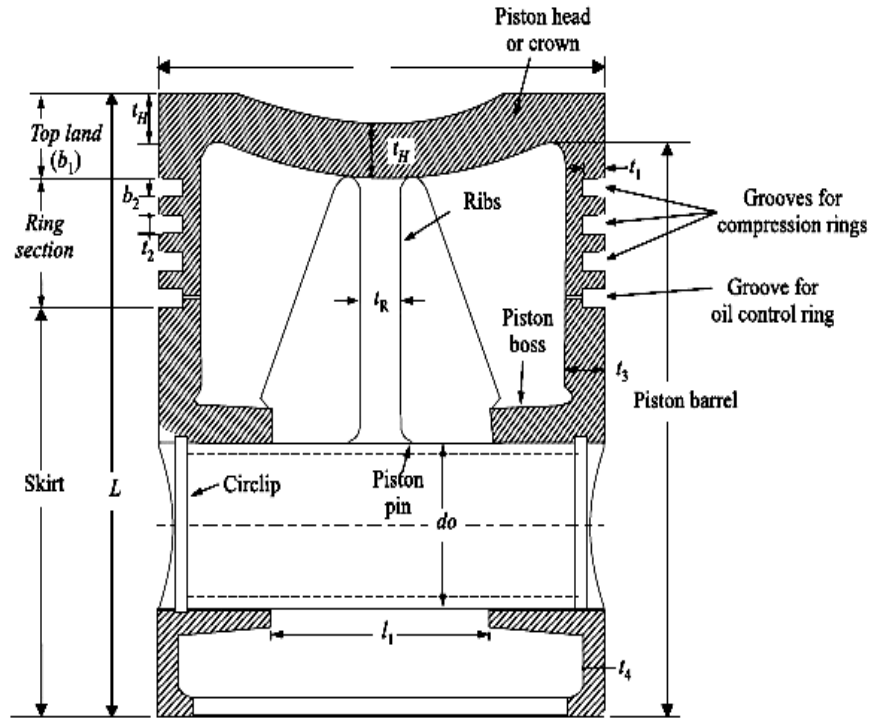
22 Forces or Loads on a Piston and Piston Dimensions [37]
